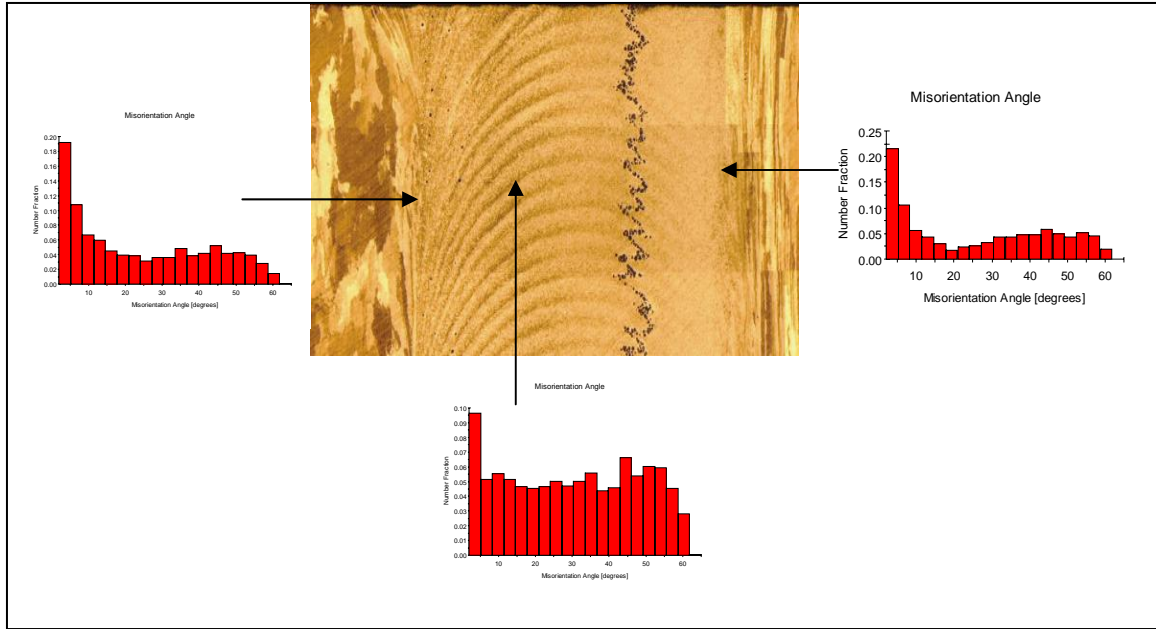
Misorientation Angle of the Plan View of Anodized to Unanodized Al-Li alloy, centerline weld with Standard tool (sample 1076)
